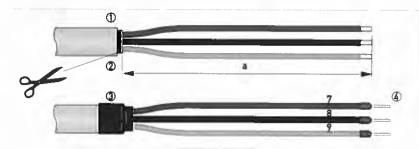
Field current cable C, preparation for the measuring sensor a = 50 mm / 2"
